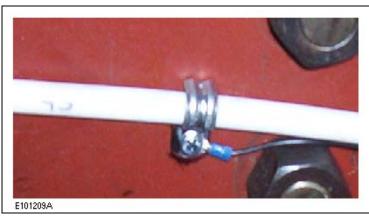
Attaching a grounding wire to the structure through a cable clamp
